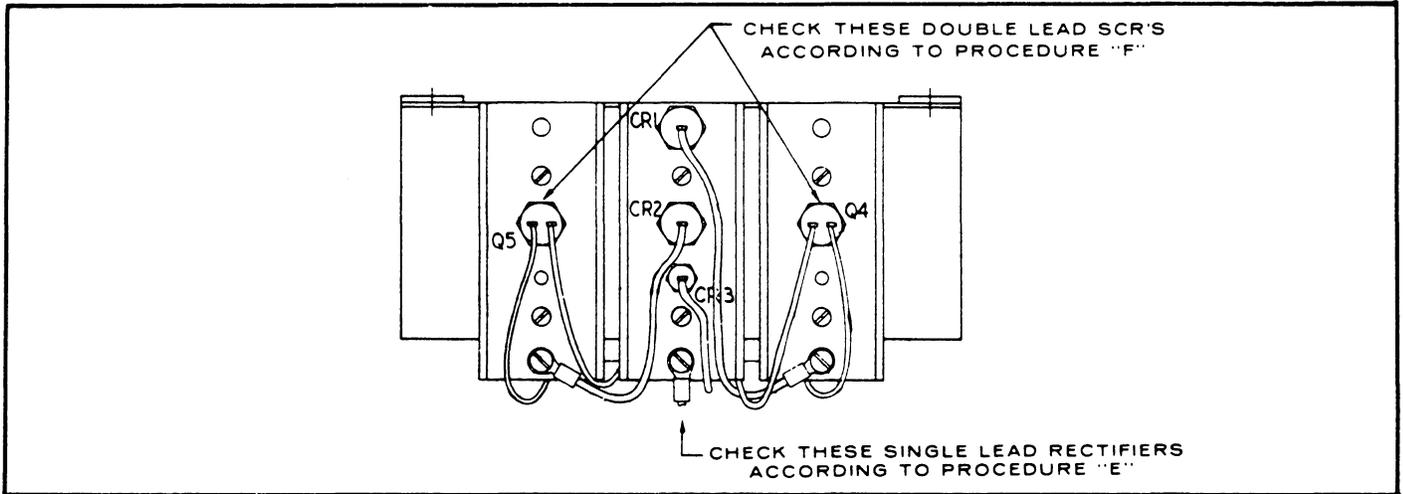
TOP VIEW OF EXCITER-REGULATOR CHASSIS ASSEMBLY
